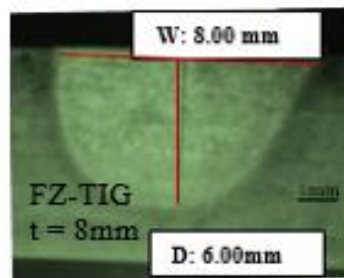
The macrostructure of FZ-TIG weld joint in 8 mm thick 2205DSS plate
